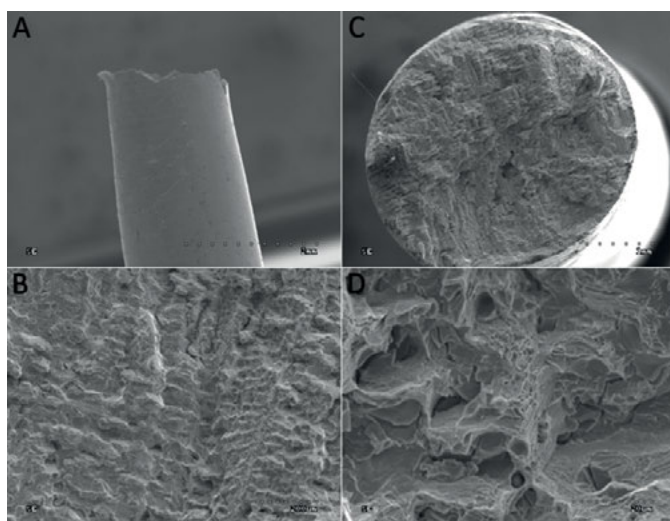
Microscopic images of fractures of the solid material. A - General view of the sample, B - General view of the fracture, C - Magnified fracture in the dendrite area, D - Magnified fracture in the mixed fracture area
